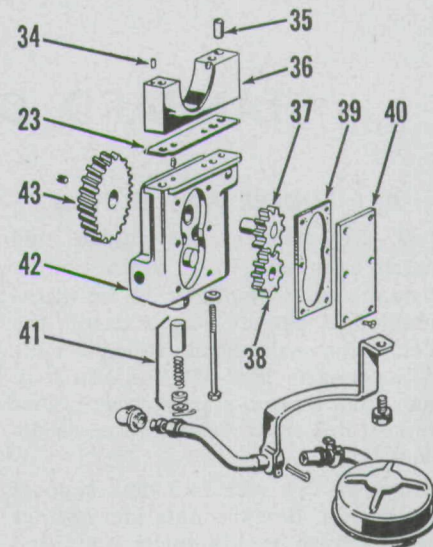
Engine oil pump on all except TO35 & MF35 Diesel is mounted on bottom side of the crankshaft front main bearing cap. Shims (23) control backlash between oil pump gear and crankshaft gear.
